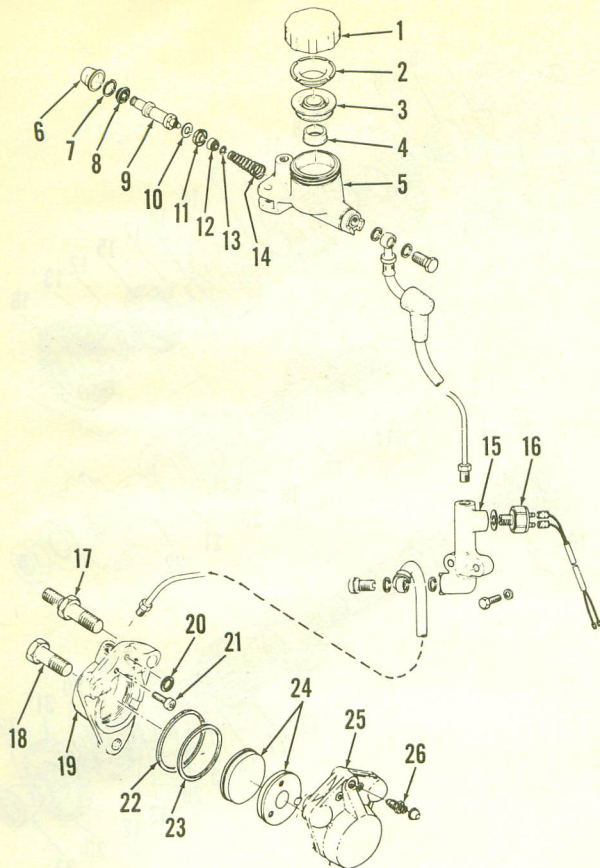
Exploded view of hydraulic brake system used on models RD350 and RD350A.
